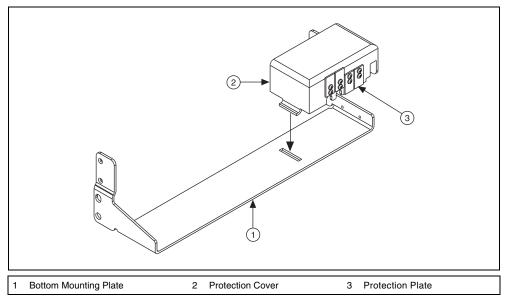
Rear Guard Consisting of the Protection Cover, Protection Plates, and Bottom Mounting Plate The rear guard installed on the MID-7654/7652 is shown in Figure 10.
